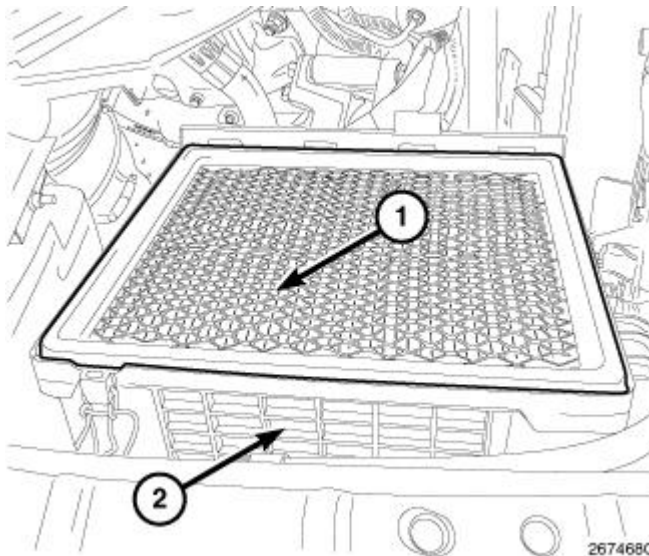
Identifying Air Cleaner Housing & Air Cleaner Filter
